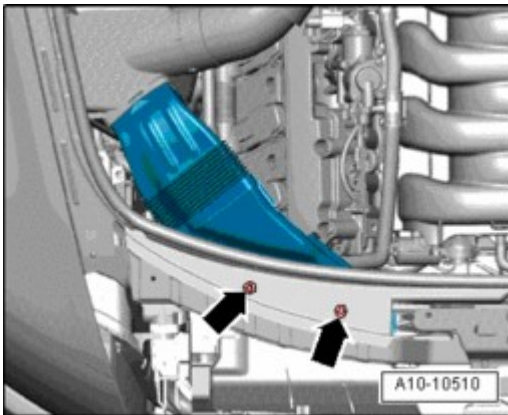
Identifying Vacuum Hoses And Bolts For Right Air Guide
